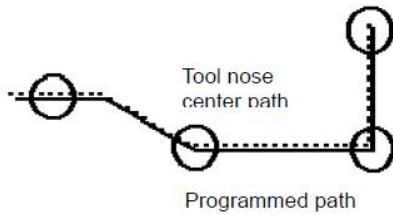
the tool nose center path is the same that of programmed path without radius compensation
